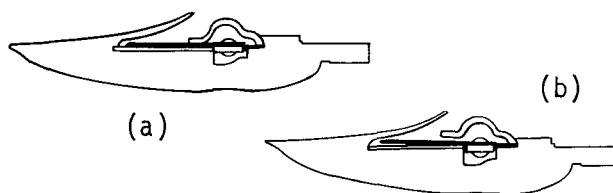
Correctly adjusted hold down clips (a) keep the knife in contact with the ledger plates. Excessive clearance between the clips and the knife (b) will result in poor cutting because of lack of contact between the shearing surfaces.
